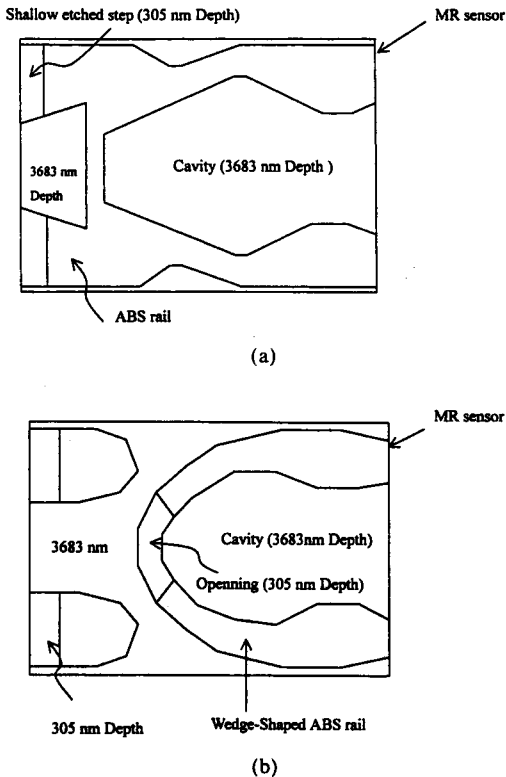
Geometrical shape of Air-bearing-surface (ABS) shape of (a) type A slider, (b) type B slider
